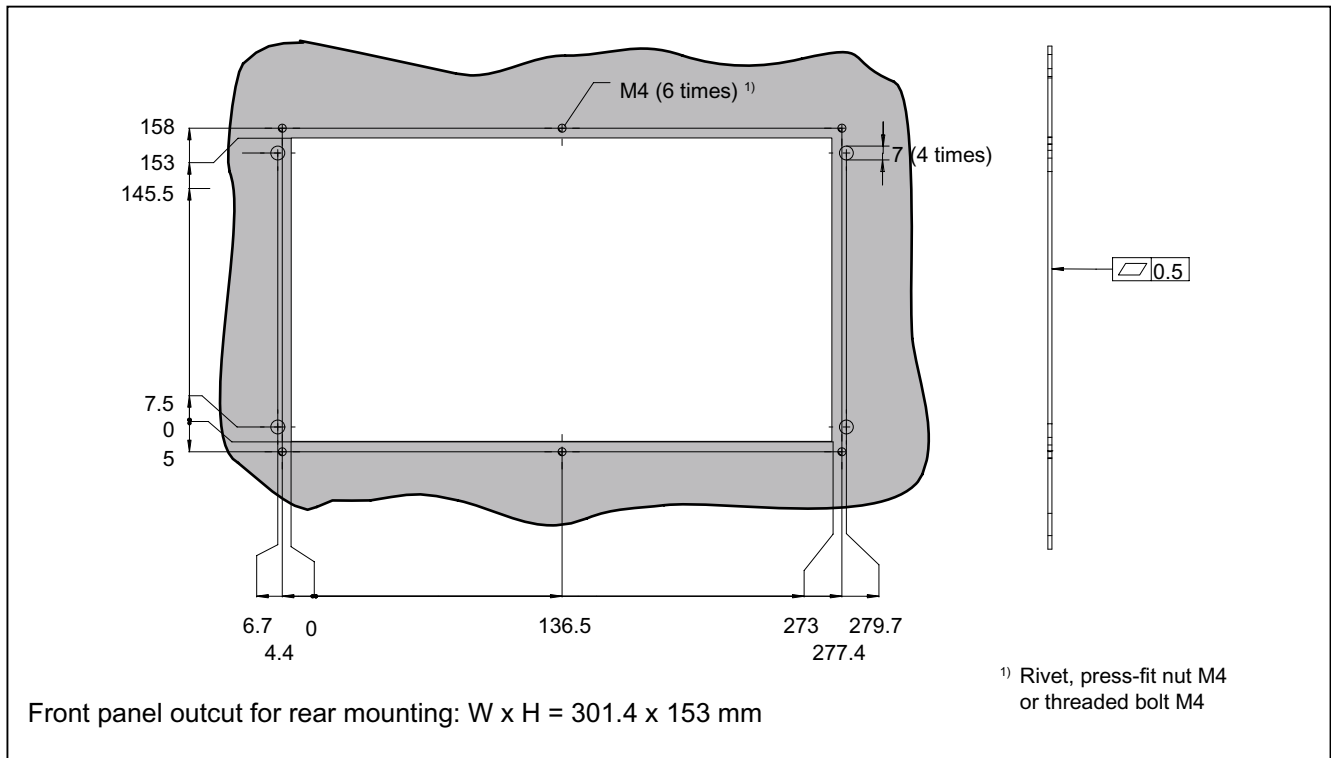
Panel cutout for CNC full keyboard OP 032S (rear view)
